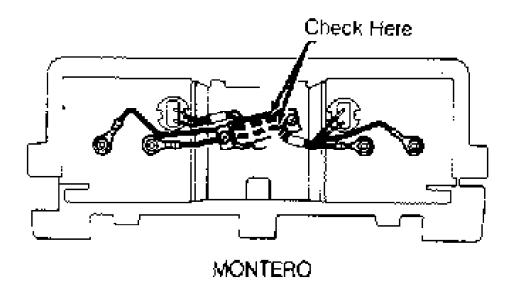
Oil Pressure Gauge Test Terminal ID (Montero) Courtesy of Chrysler Motors
